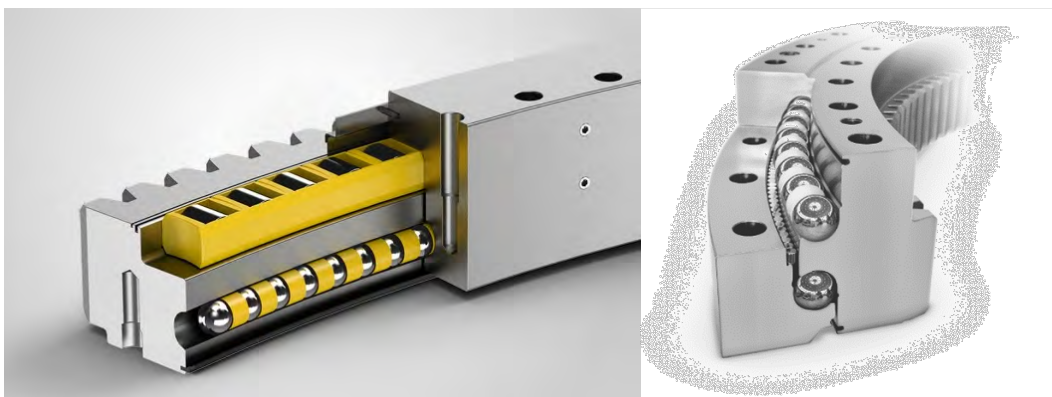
Double row roller-ball slewing bearing (left) [39] and triple row roller-ball slewing bearing (right) [40].
